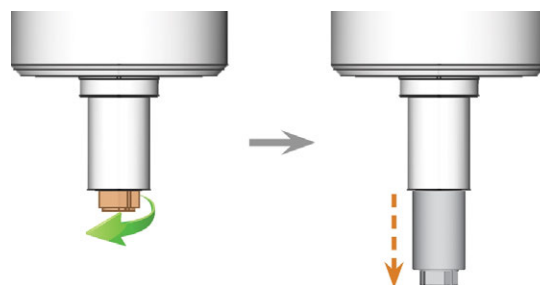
UNSCREWING THE COLLET CHUCK (MARKED ORANGE IN LEFT ILLUSTRATION) WITH YOUR HAND
